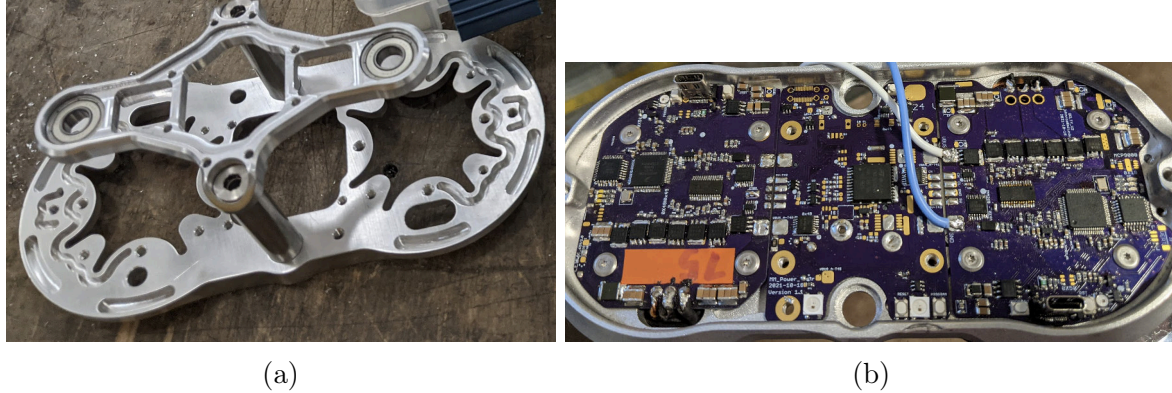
Belty’s backbone is machined out of a 12.7 mm thick 7075 aluminum plate in order to have high stiffness, and to help distribute the heat from the motors. The frame (a) consists of two machined aluminum plates held together with two 12 mm diameter steel standoffs. Additionally, the bathtub-shaped design (b) of the backbone allows the control circuitry to be protected from impacts.
